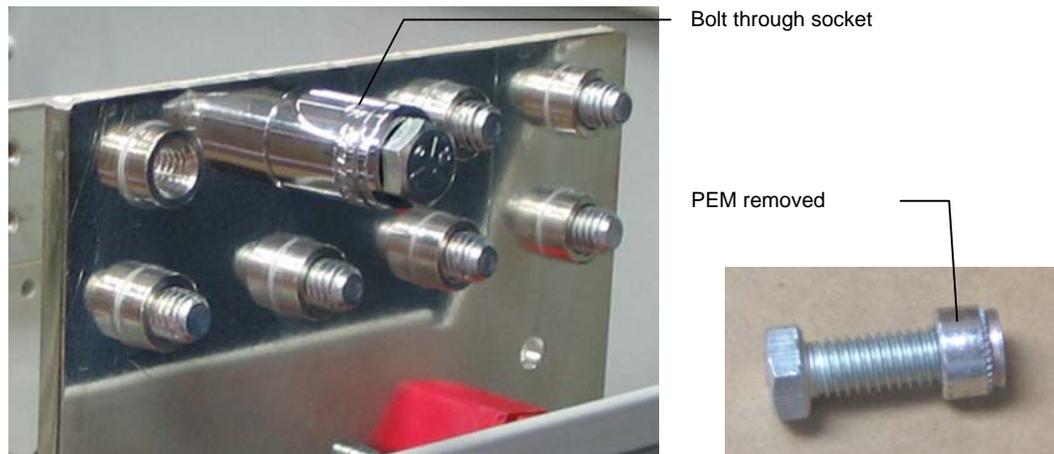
PEM nut removal for back-to-back connections on the battery bus bars
